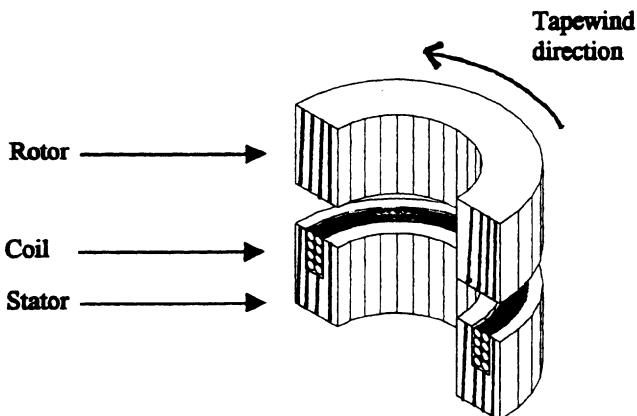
Exploded cut view of tapewound laminated rotor, stator, and coil.
